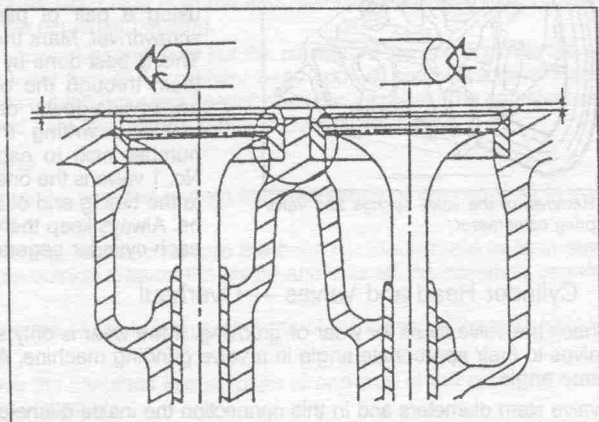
Diagram showing the valve heads below the cylinder head face.
